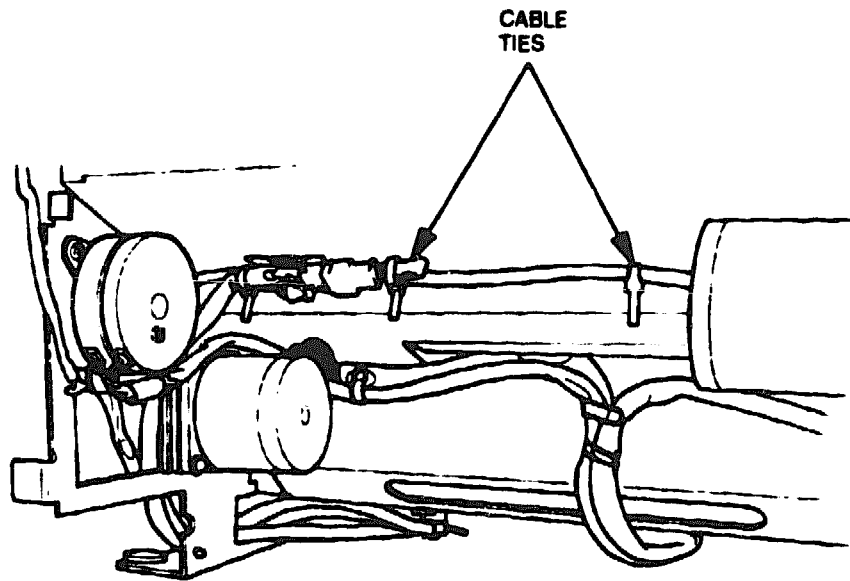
Cut Sheet Guide Base Frame Cable Ties
